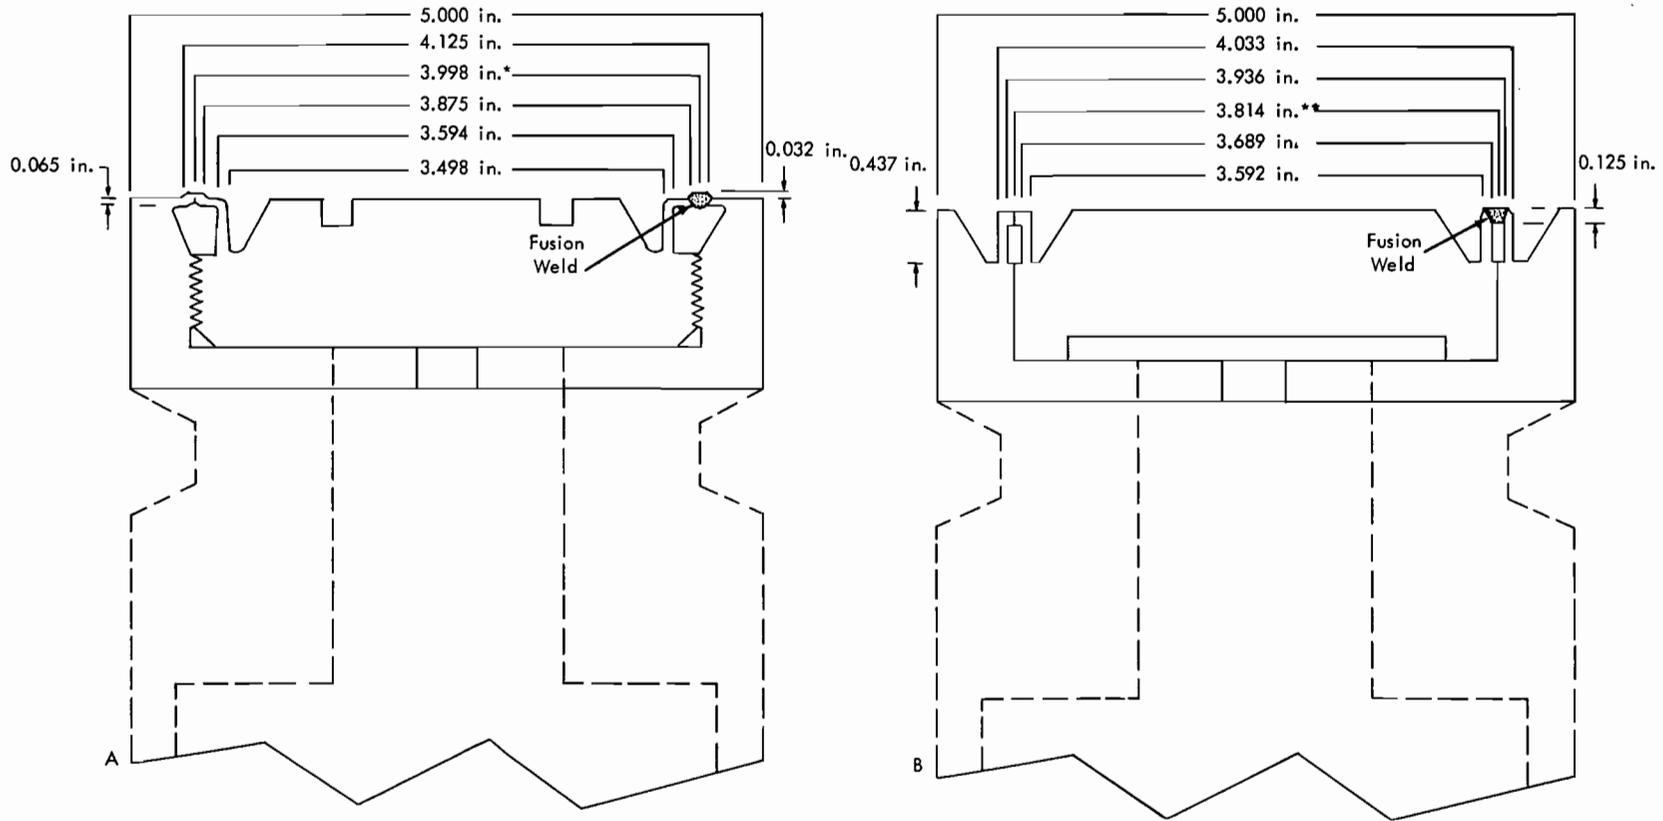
Cross section of weld joint designs A and B. Solid lines show simulated weld test sample, broken lines, its orientation to the calcining pot neck. *Joint clearance for assembly is 0.001 in. Male dimension shown; female dimension 3.811 in. for shrink fit.
